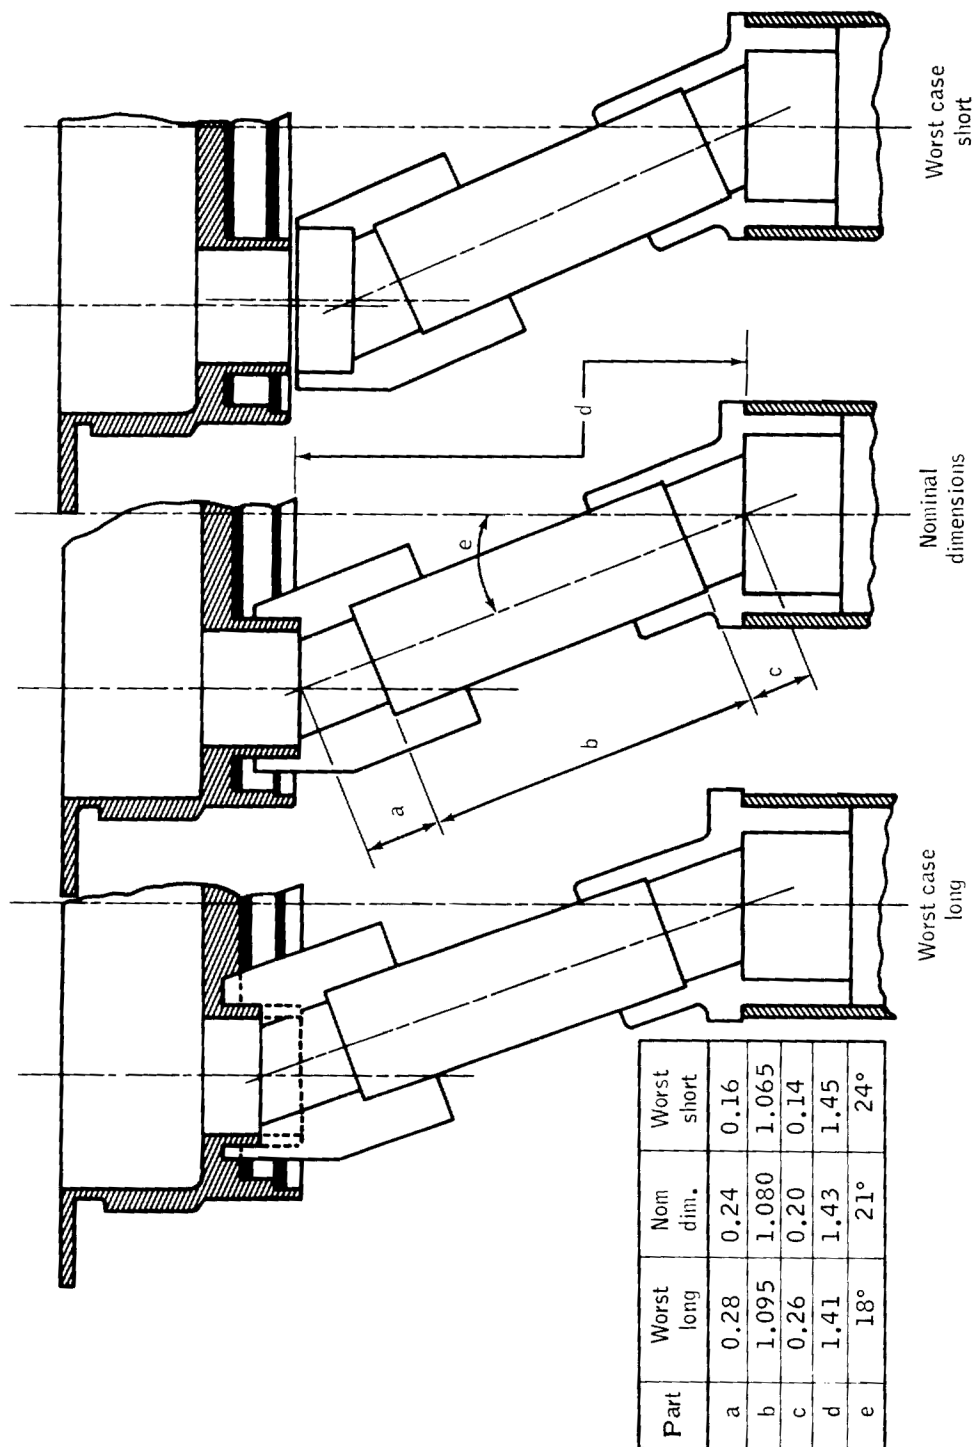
Extreme and nominal tolerance cases for fill tube connection parts.
